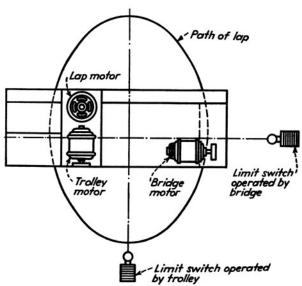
In a machine for polishing telescope mirrors, an elliptical motion of the polishing lap is sometimes required. Controls are arranged to reverse bridge motor at center of trolley motion and to reverse trolley motor at center of bridge motion.
